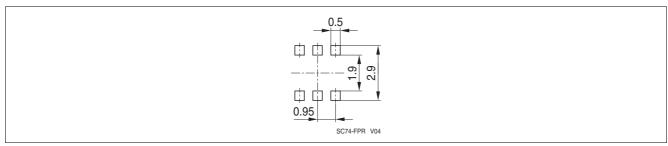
Package Footprint for SC74 (dimensions in mm)
